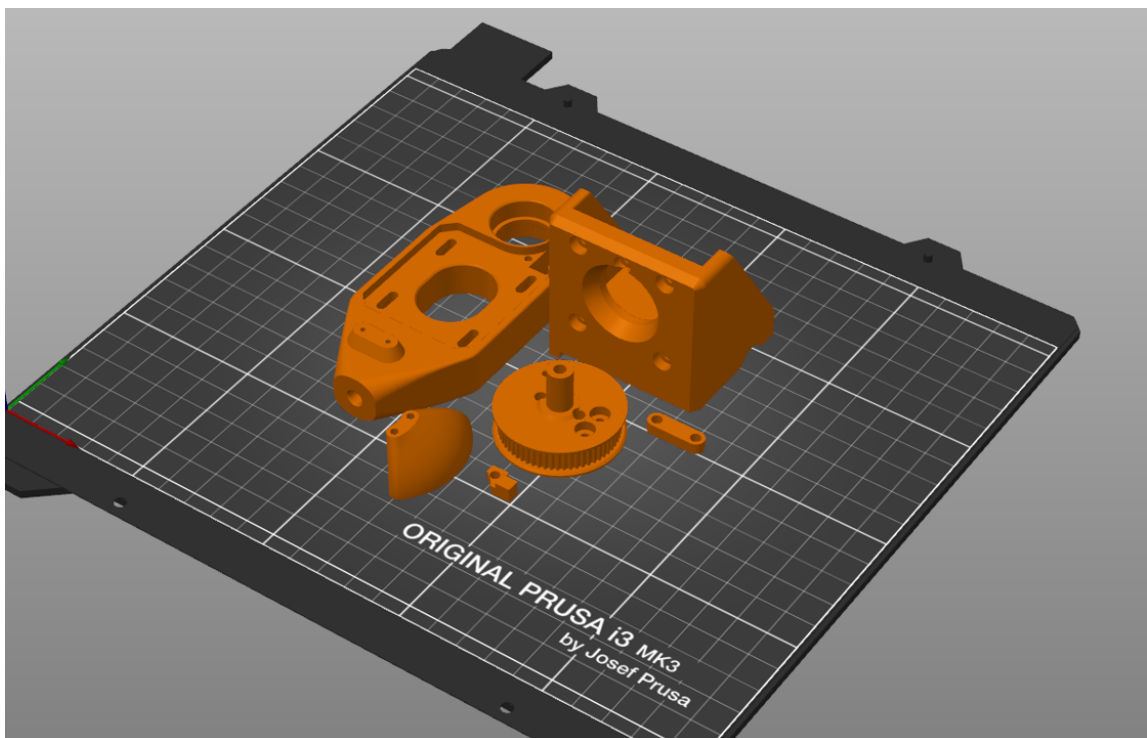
Typical size (Prusa mk3) build plate shown fitting all printable parts of RW2 printhead.
